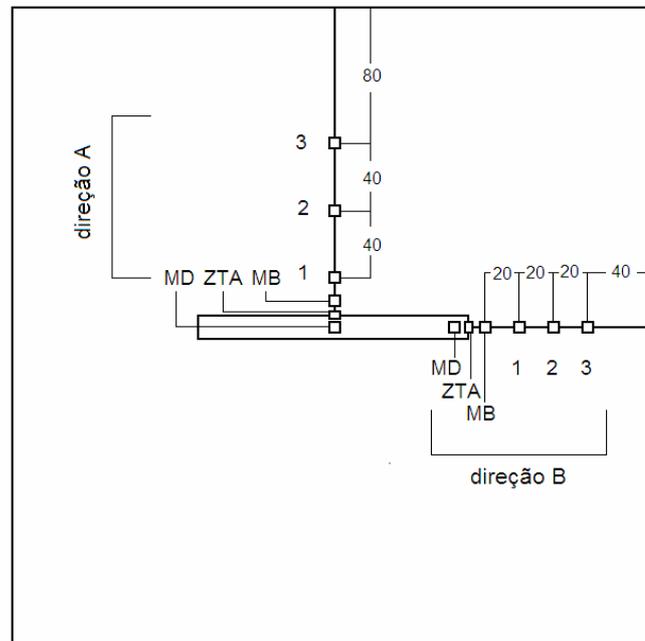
The location of the measurement points of the welding residual stress related to the repair welding
